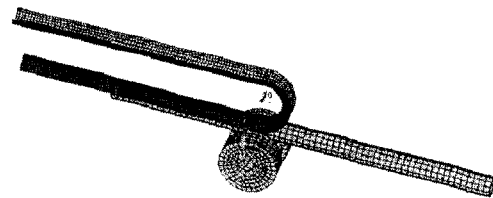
Meshed shape of draw bending part with mandrel, bending die, copper pipe, etc.
